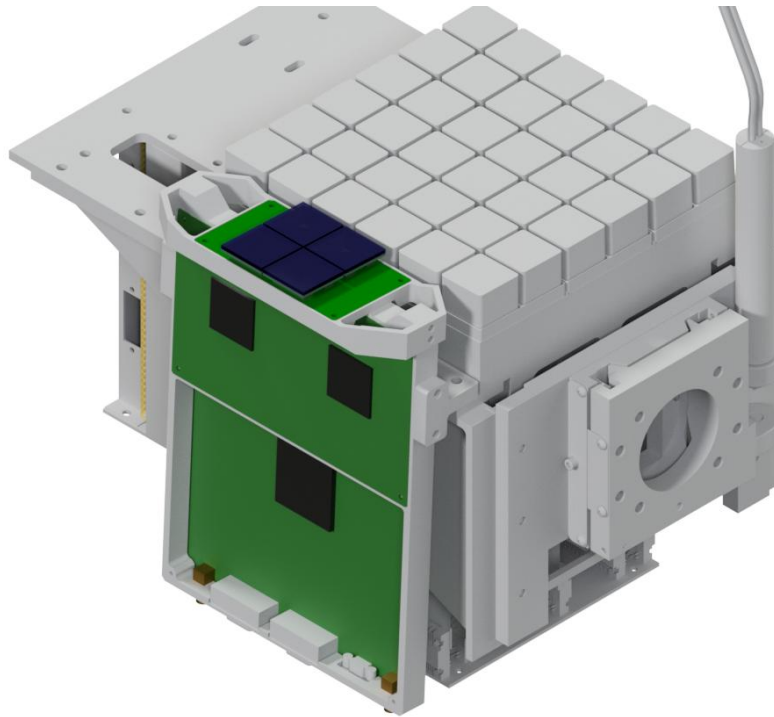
Full assembly of PDM with SiECA attachment. CNC Aluminum frames under production at KIT
